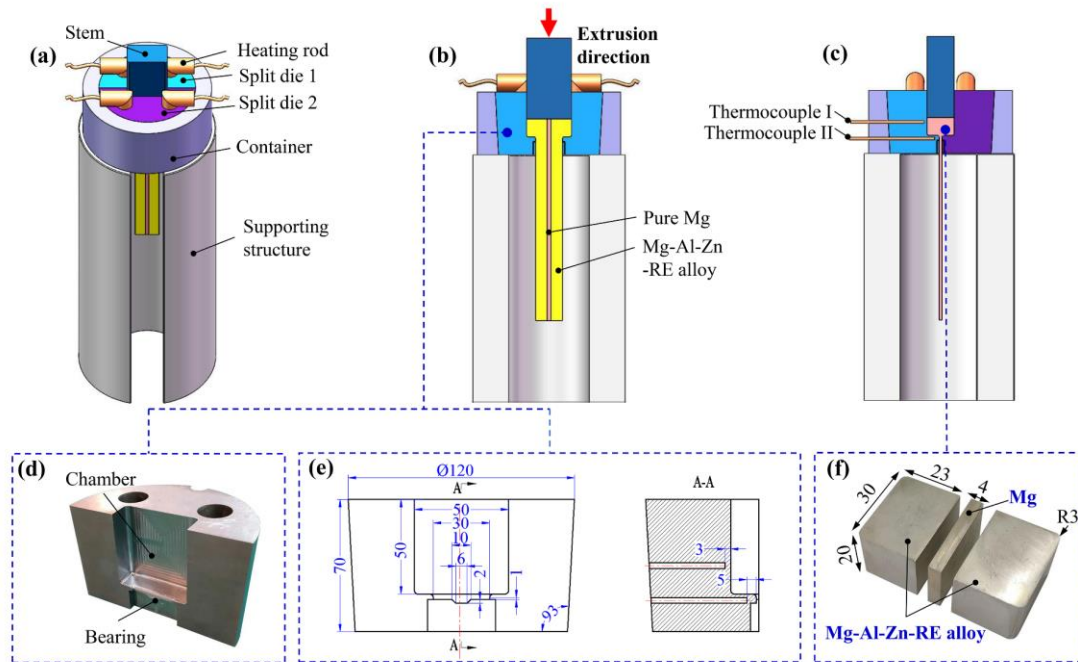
Schematic of the extrusion-welding tooling setup: (a) oblique view, (b) front sectional view and (c) side sectional view, (d) die set, (e) dimensions of the die set, and (f) sandwich-structured billet with pure magnesium at the middle and the magnesium alloy on both sides.
